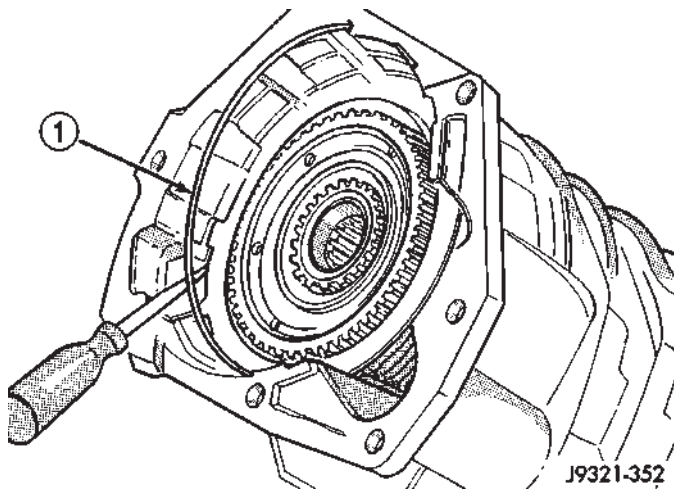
Removing Overdrive Clutch Pack Retaining Ring
